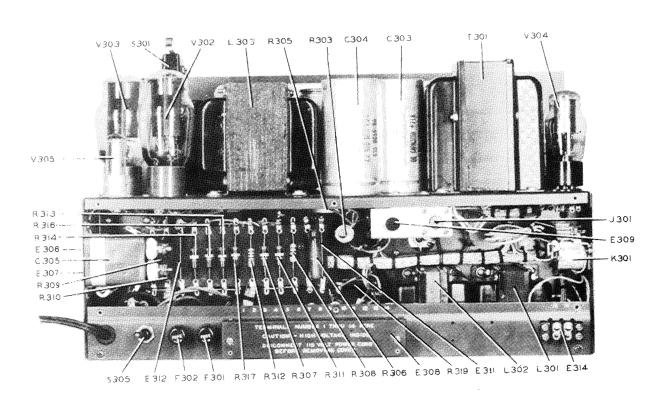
6 32V-2 PARTS ARRANGEMENT-REAR OPEN
